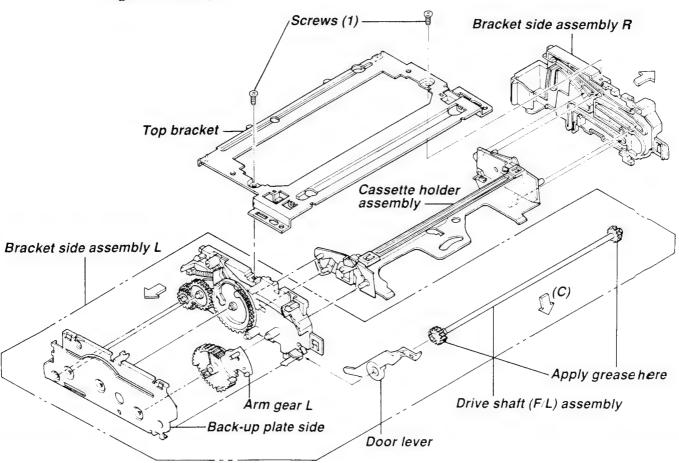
Drive shaft (F/L) assembly replacement
